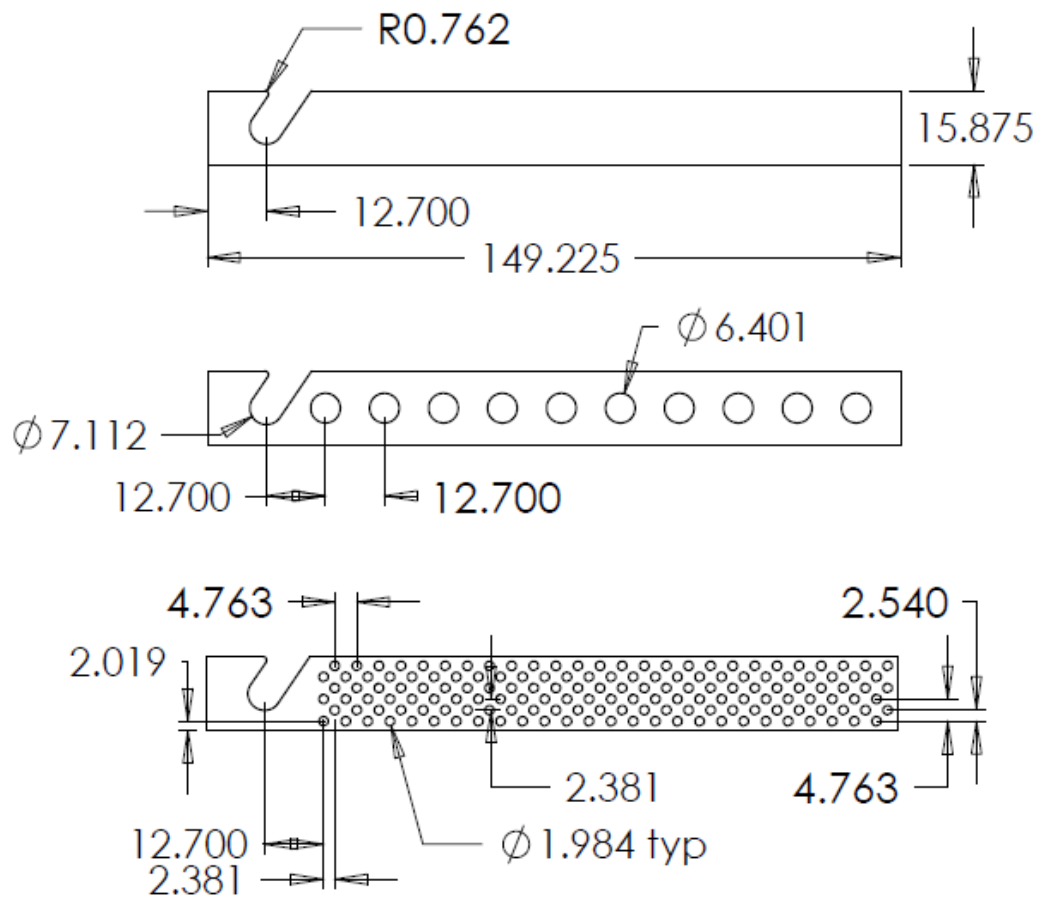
Dimensioned drawing of solid plate (top), large-hole plate (middle) and small-hole plate (bottom) (dimensions in mm)
